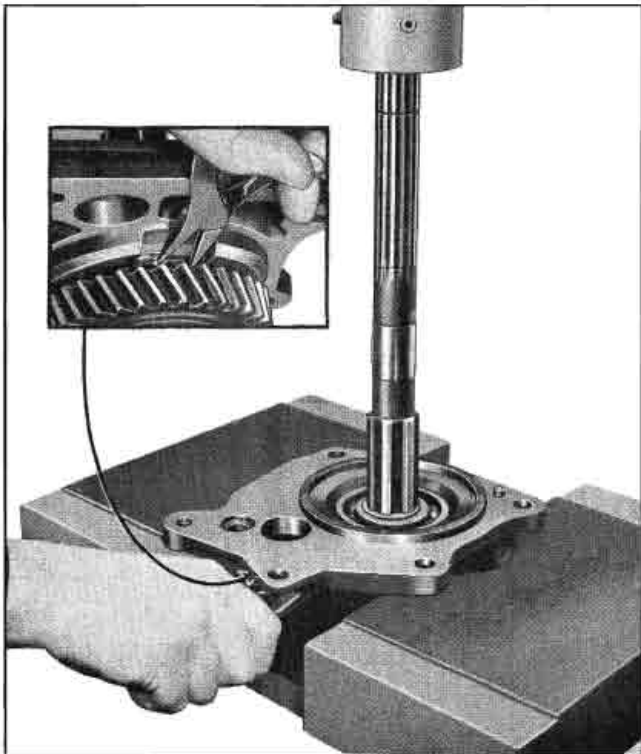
B-18 Removal of Mainshaft from Rear Bearing Retainer
